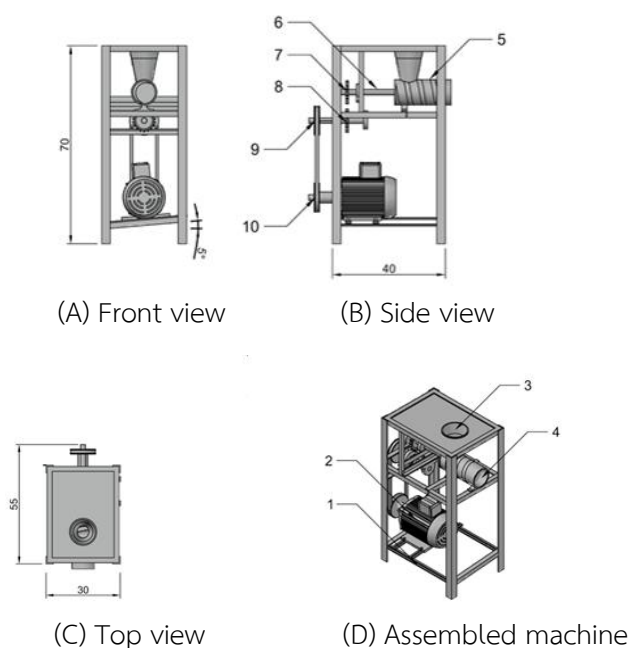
Exploded views (A-D) of the mincing machine with an electric motor
